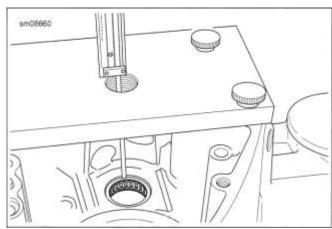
Measure from Top of Support Plate to Edge of Needle Bearing
